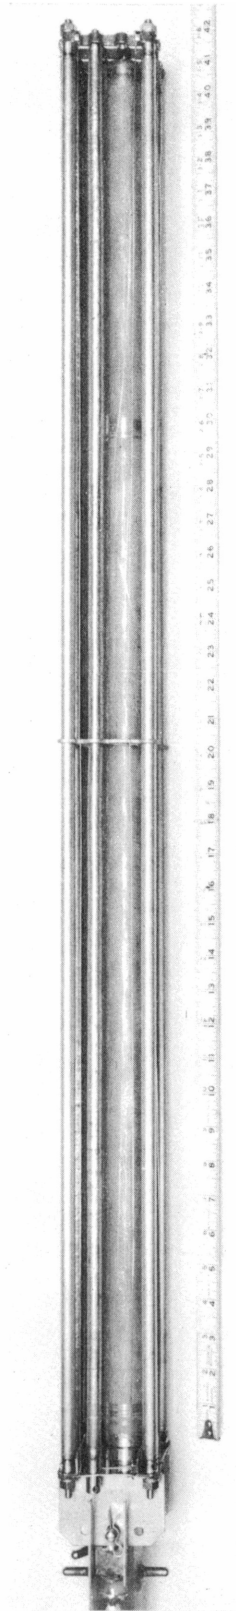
SIDE VIEW OF ASSEMBLY 4-L
